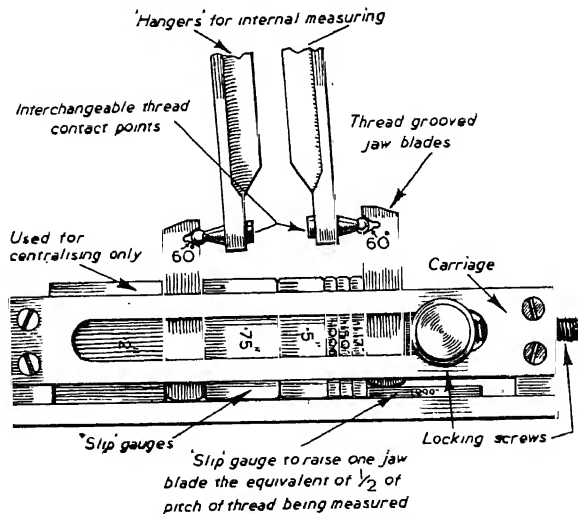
Setting arrangement for comparative checking of internal thread diameters.
